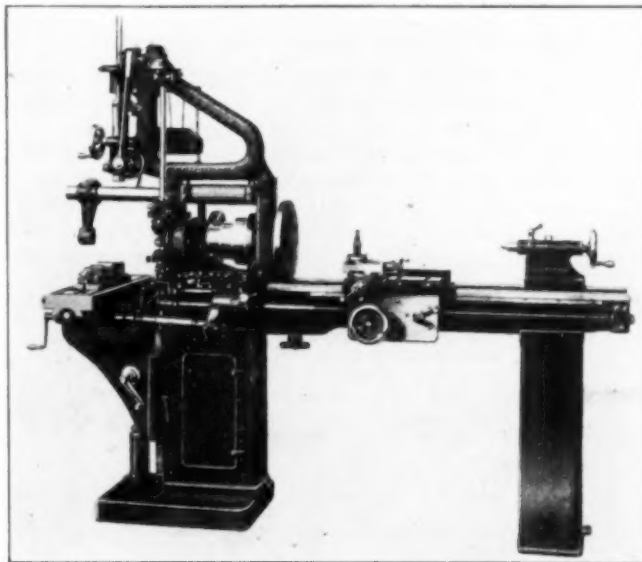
COMBINATION LATHE, MILLING AND DRILLING MACHINE
